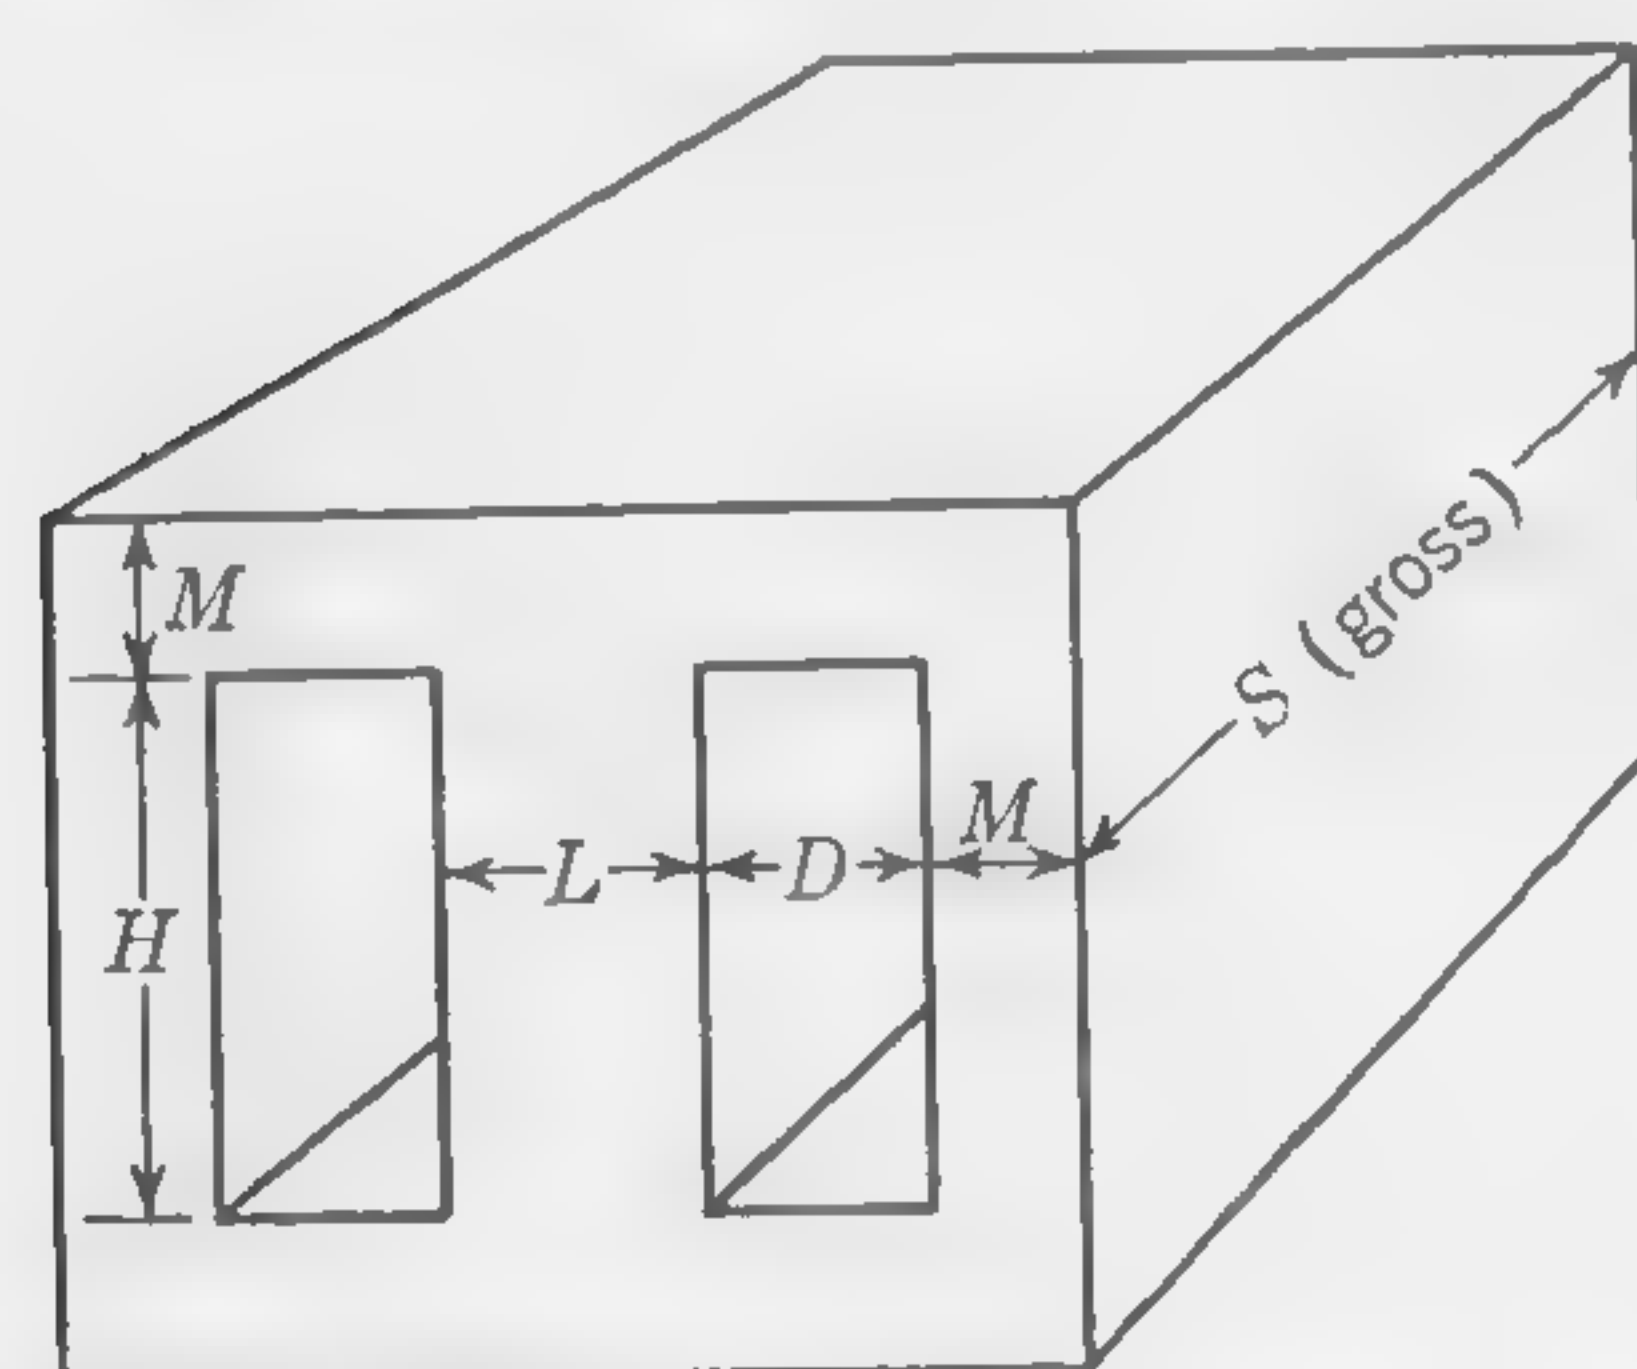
Assembled stampings of single-phase shell-type transformer.
